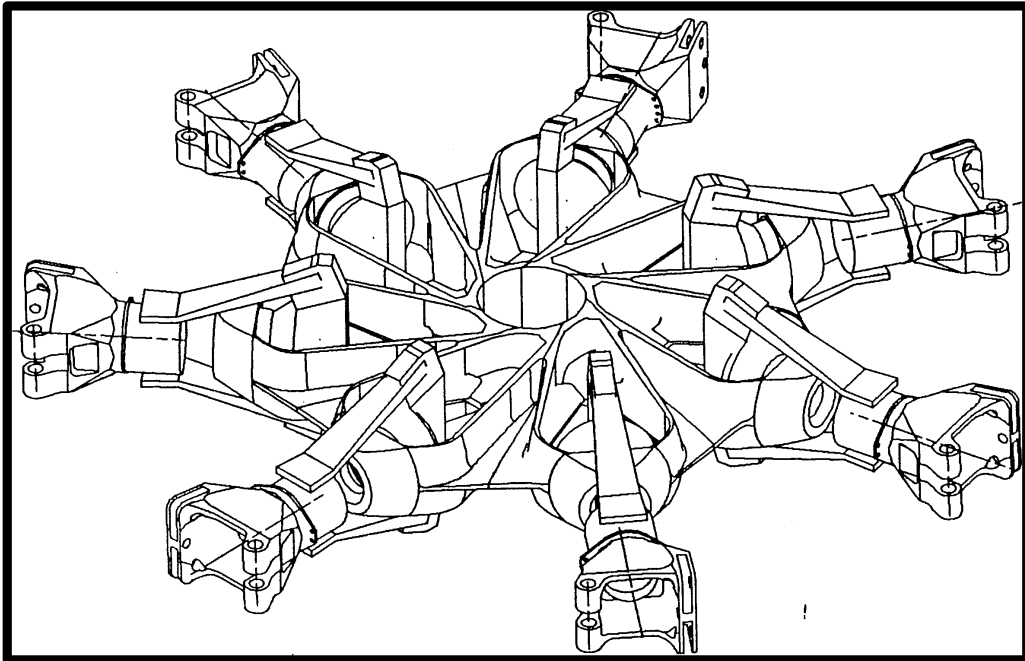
CH-53E Seven Bladed Elastomeric Rotor Head [After Ref. 11]
